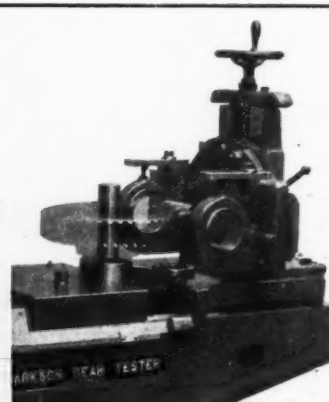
Worm-gear Testing Fixture on Parkson Tester
